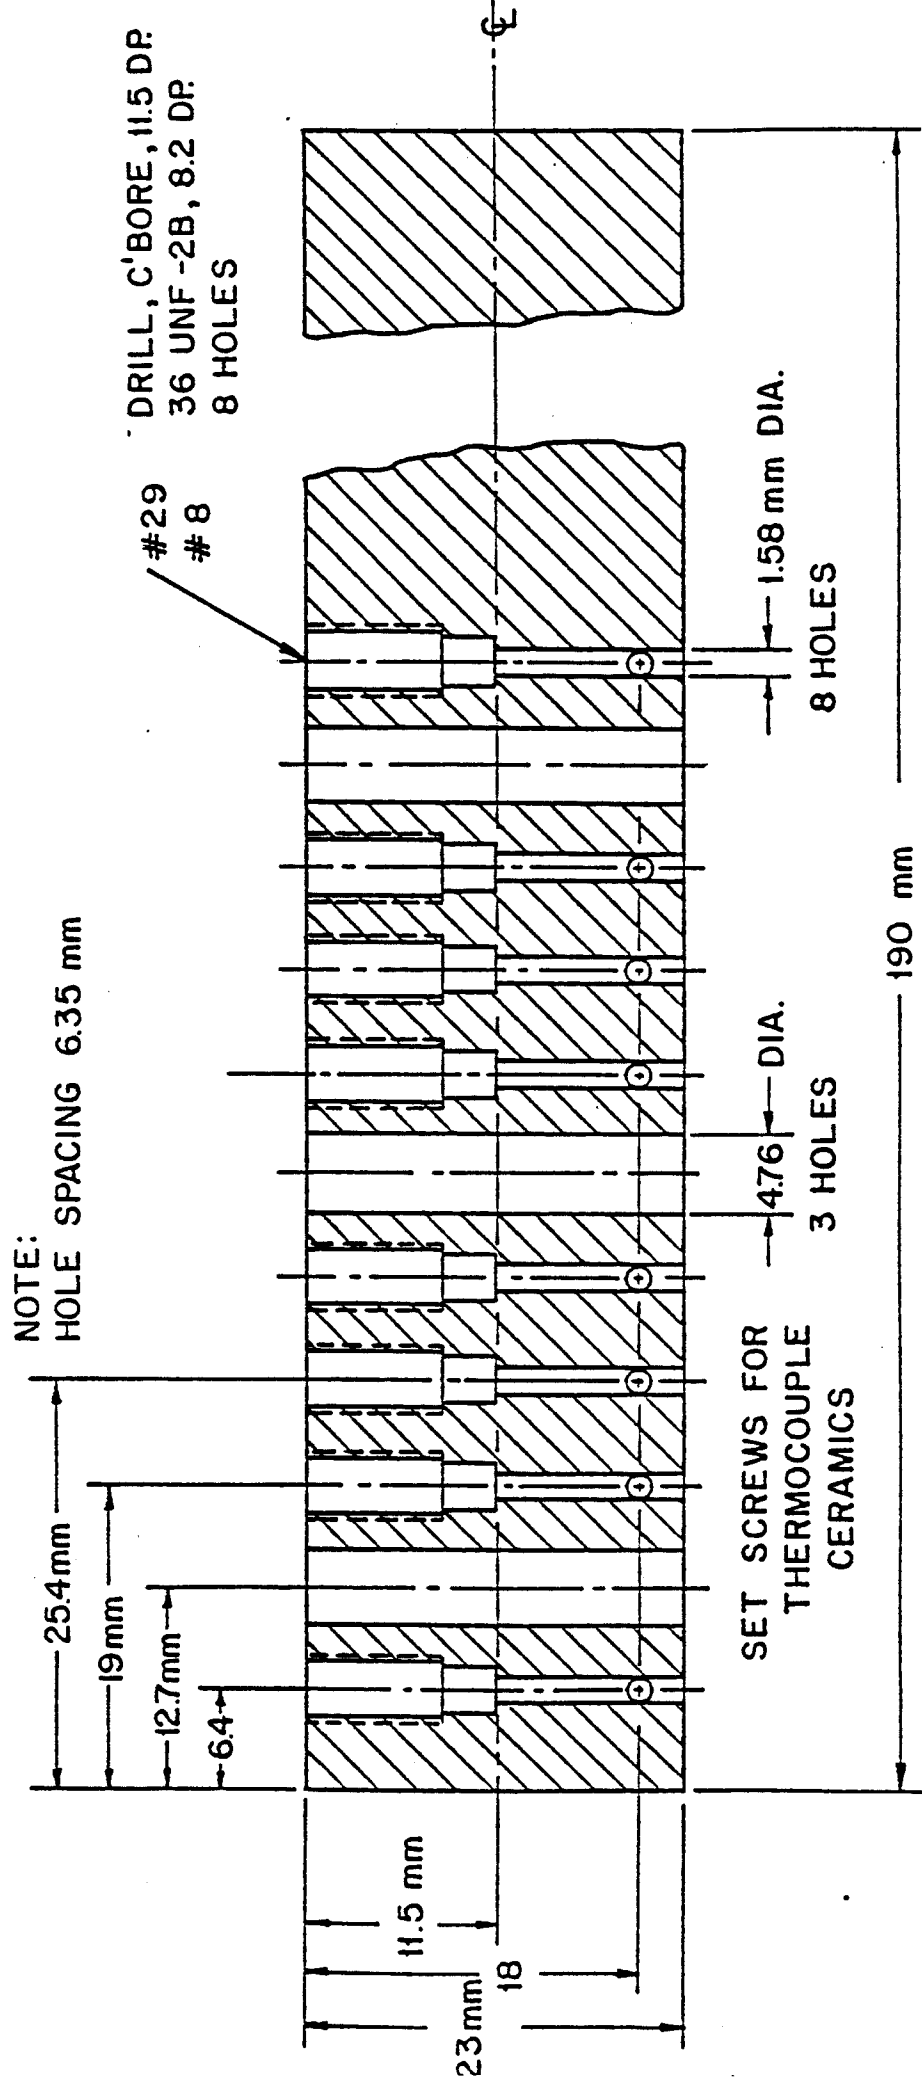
The aluminum sample holder shown in cross-section illustrating the 8 sample positions and 3 beam diagnostic holes.
